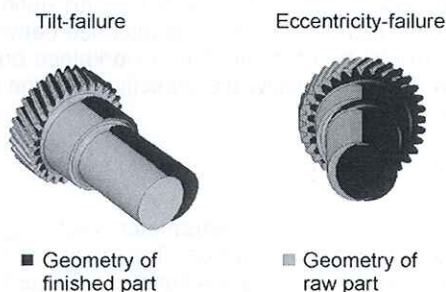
Eccentricity- and tilt-failures of a pinion shaft (super elevated), © IMR
